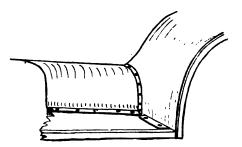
The older method was to bolt the side apron on to the running board. A half-oval moulding was welded to the side apron and this was countersunk for French head bolts.
